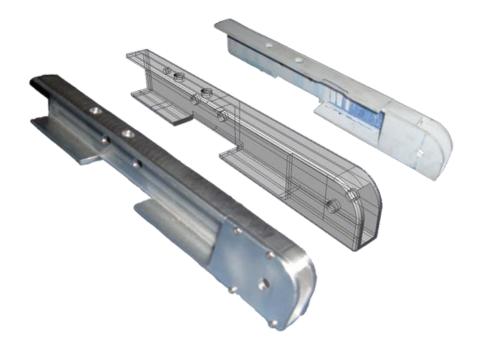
(From right to left): Mock-up, 3D model, fabricated metal prototype.
